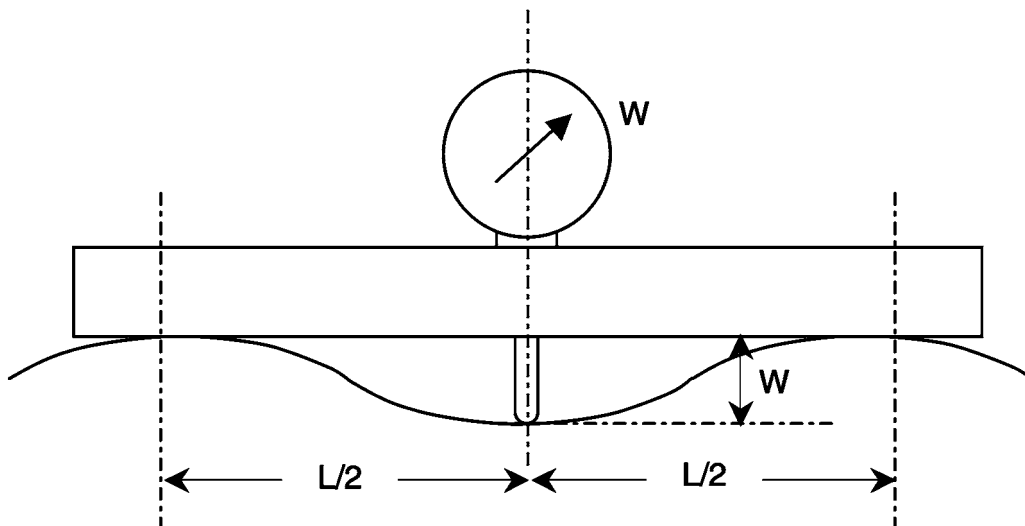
"Flat Bottom" Roll Wave Gauge with Dial Indicator
